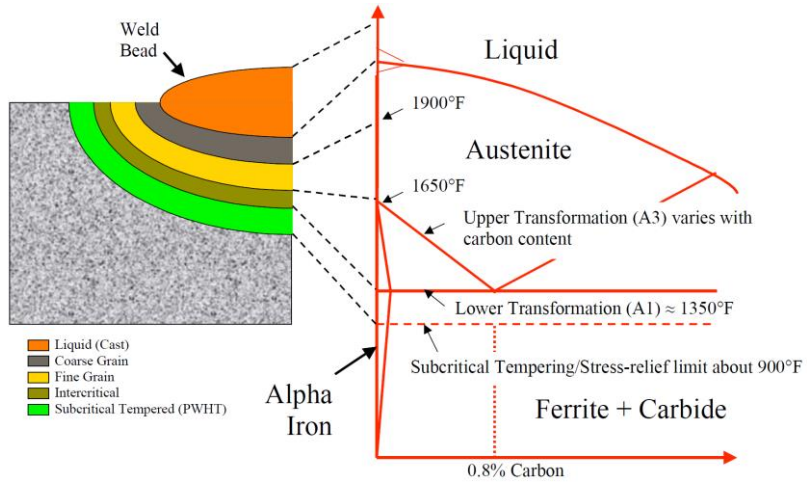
Weld bead and HAZ related to the carbon steel equilibrium diagram[90]
